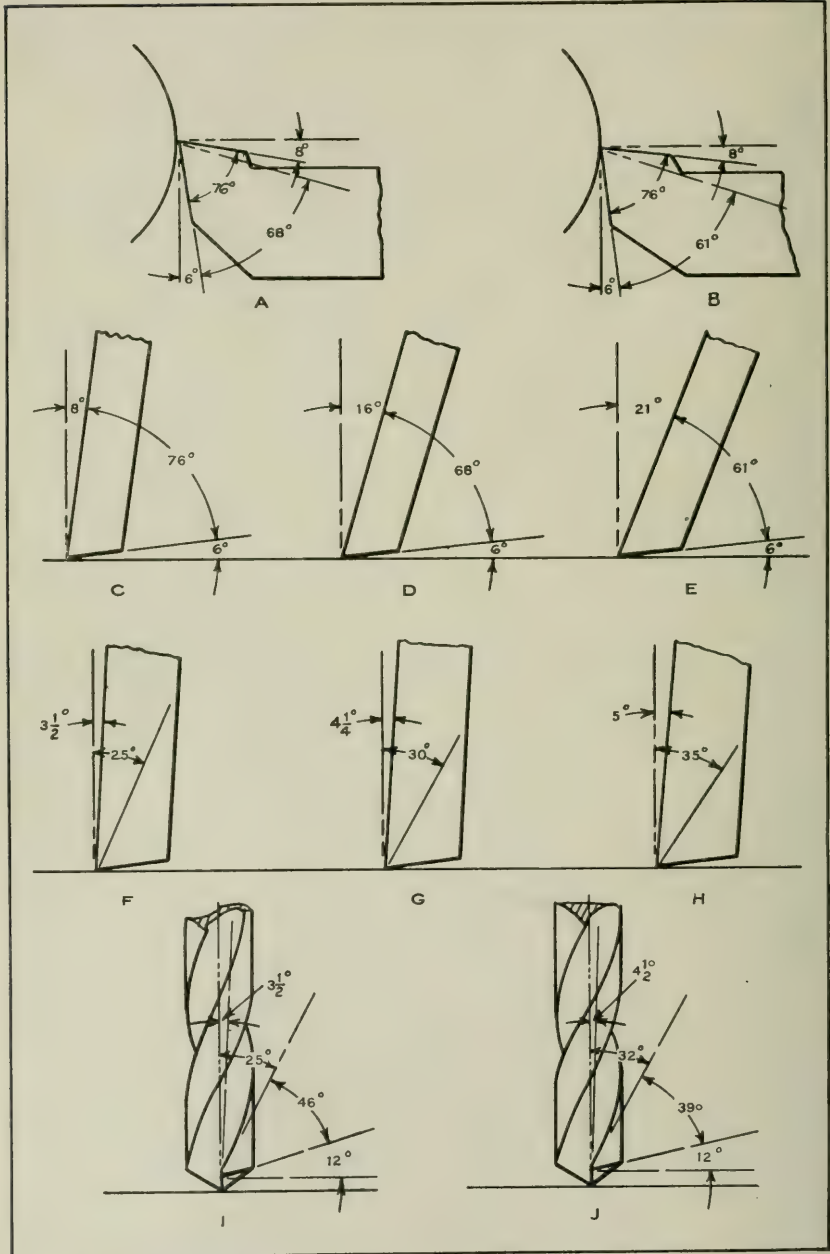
STANDARD CUTTING TOOLS SHOWING THE CLEARANCE AND CUTTING ANGLES
